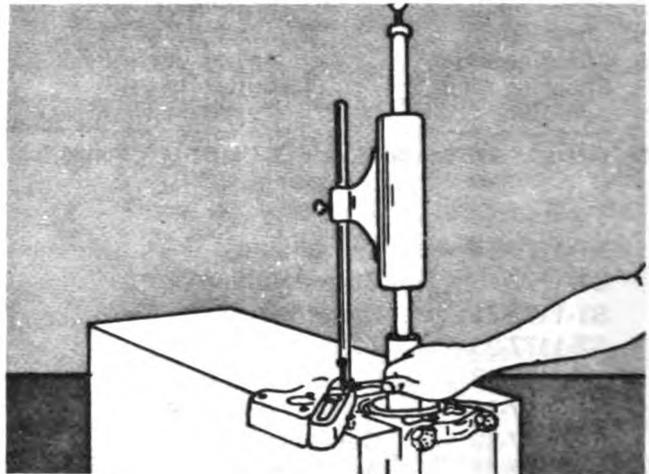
Install The Torsion Bracket To The Cylinder Block.
